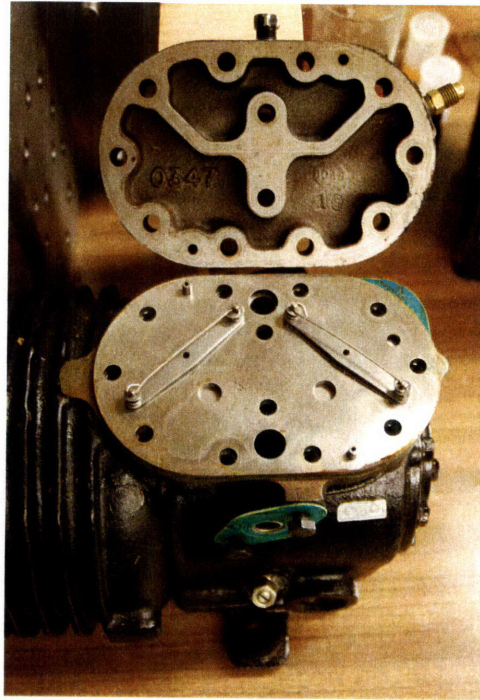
View of compressor internals, with the inside of the head and the top of the valve plate illustrating the discharge valves and the suction ports.
